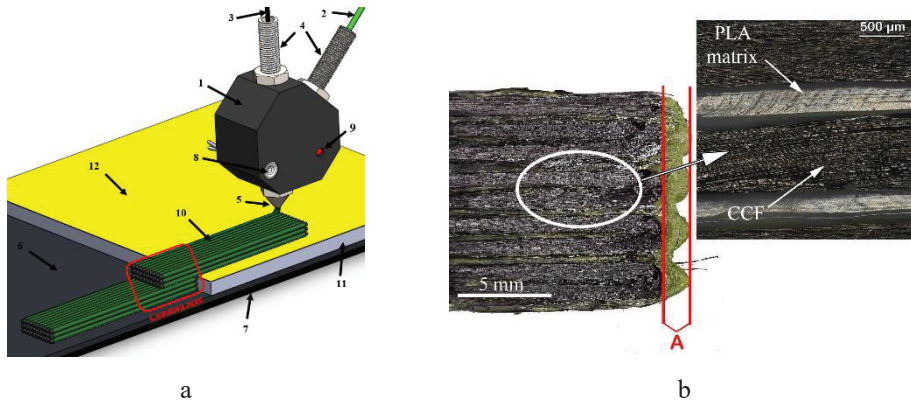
Printing process: a – scheme of the printing process; b – pulling effect; 1 – improved heating element; 2 – thermoplastic; 3 – impregnated CCF; 4 – guiding tubes; 5 – nozzle; 6 – borosilicate glass plate; 7 – metal printing platform; 8 – heater; 9 – thermocouple; 10 – overlap area; 11 – steel plate; 12 – Kapton tape
